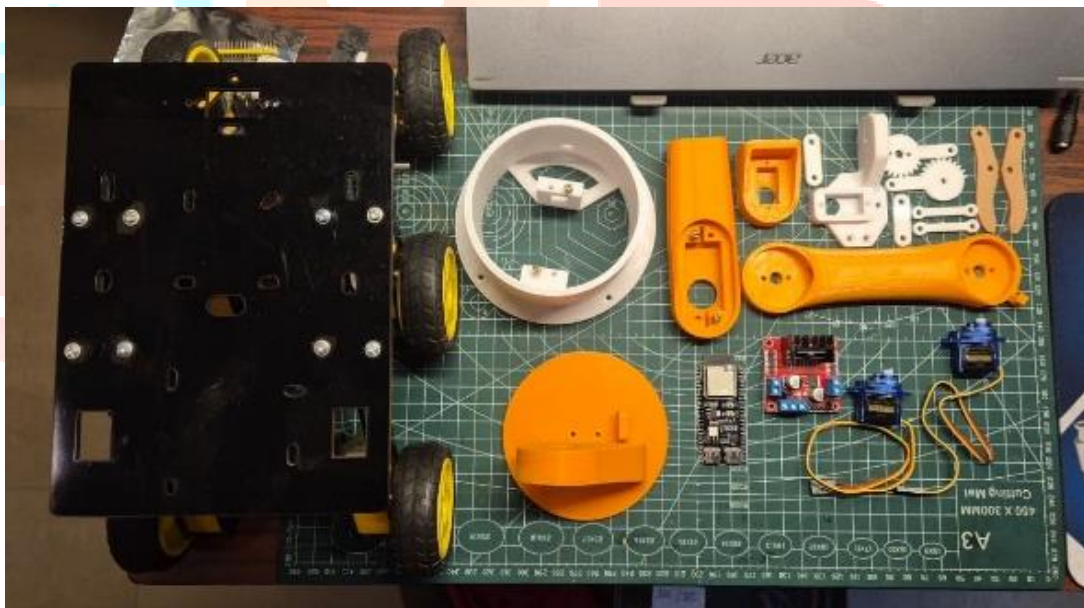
Exploded view of the D.E.F.U.S.E. mechanical and electronic assemblies.
